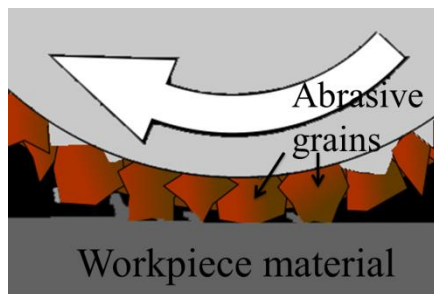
Schematic drawing of a grinding wheel, showing abrasive grains remove material from a workpiece.
